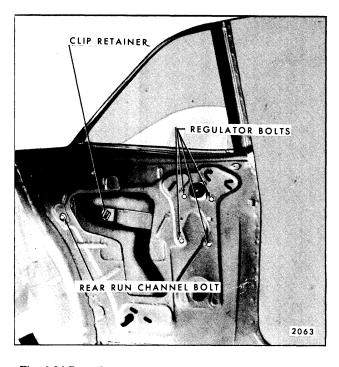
Rear Quarter Hardware Attachment - "X" Closed Styles
